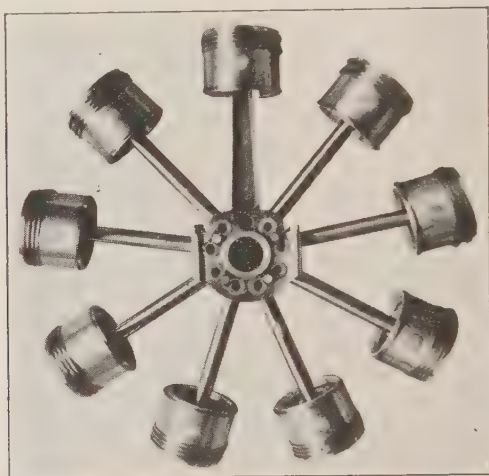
Connecting rods of Wright Whirlwind engine. (Courtesy Wright Aeronautical Corp.)
